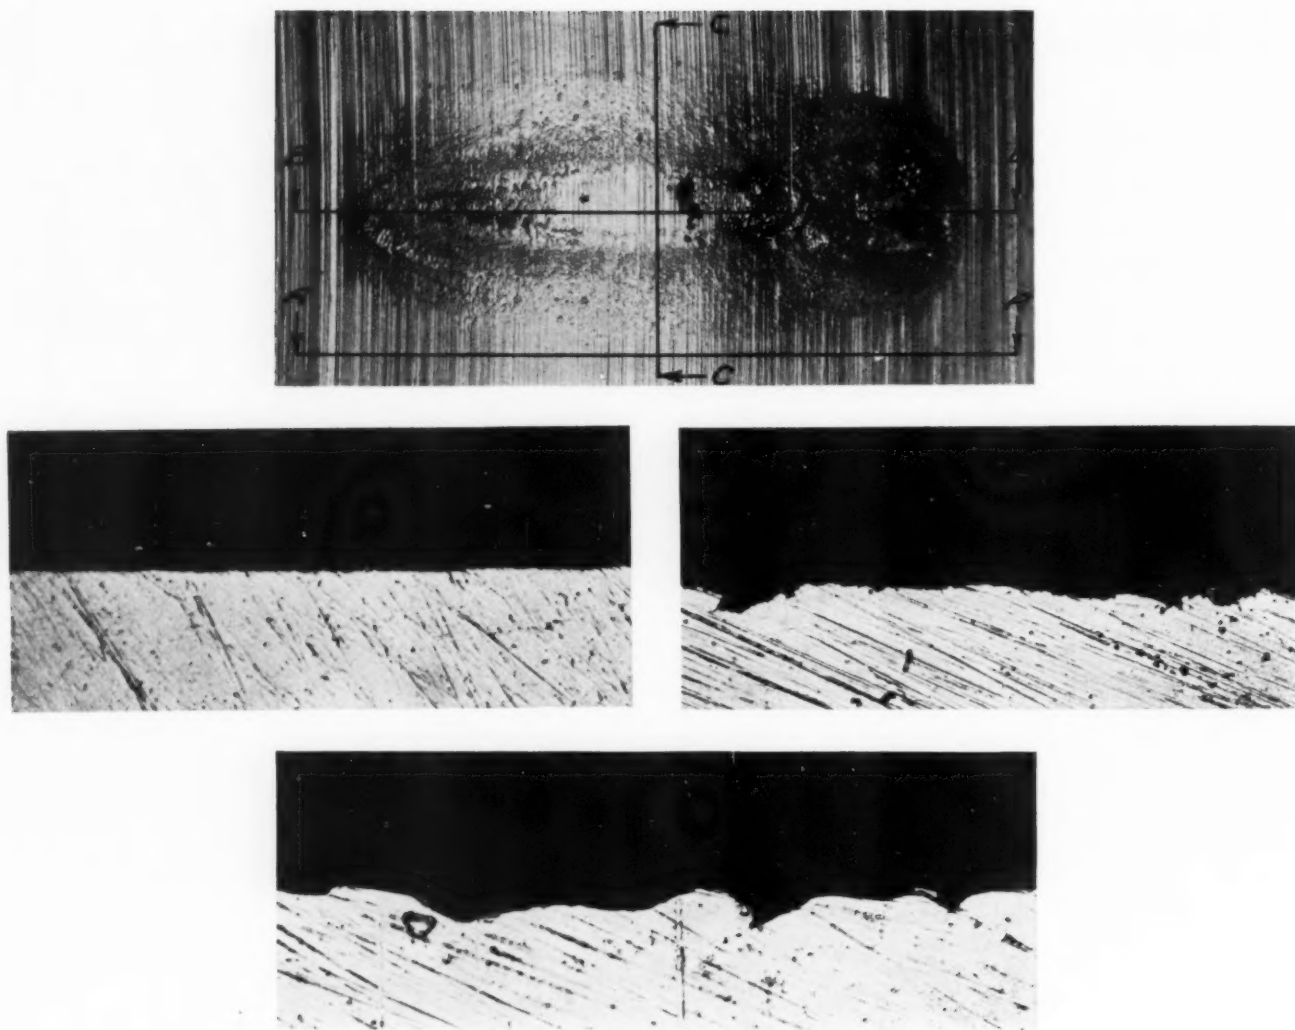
NATURE OF DAMAGE PRODUCED BY WEAR-TEST MACHINE
